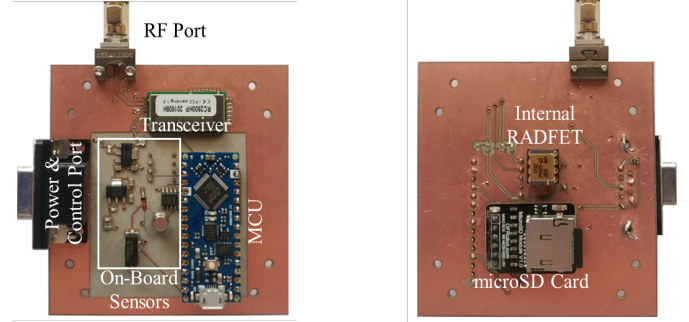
Manufactured prototype PCB with RO4003C and LPKF U4.
